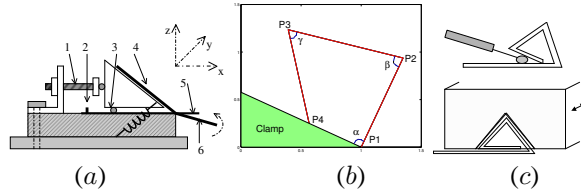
Triangular beam construction: (a) folding mechanism: (1)clamp-position adjustment screw, (2)alignment pin, (3)clamp point contact, (4)upper razor blade, (5)stainless steel sheet, (6)rotating razor blade (b) folding configuration (c) gluing process
